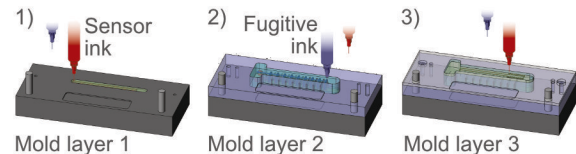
EMB3D printing a sensorized soft finger. (1) The dorsal matrix is cast into the first mold layer for printing the curvature sensors with the sensor ink. (2) The second mold layer is added, and the actuator matrix is poured in for printing the actuator networks with the fugitive ink. (3) The final mold layer is added, the anterior matrix is added, and the contact sensors are printed. All sensor leads and actuator inlets are printed in the actuator matrix.
